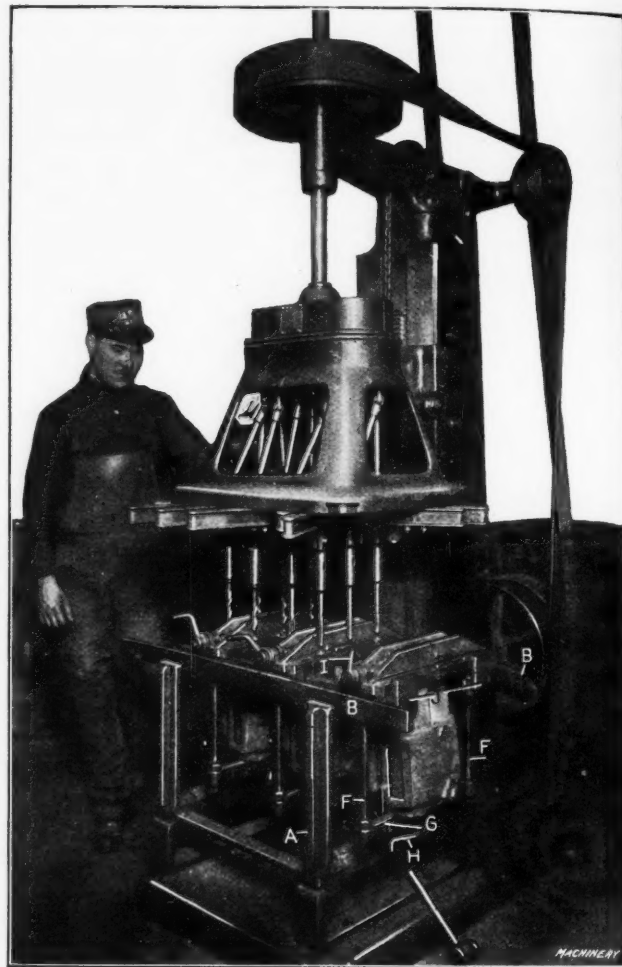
Progressive Drilling and Reaming of Flange Holes in the Base of the Cylinder Casting
